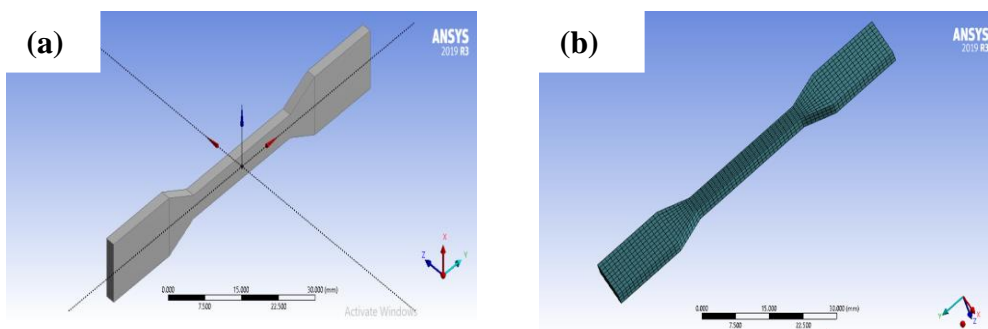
(a) CAD and (b) FEA design of the tensile test specimen
